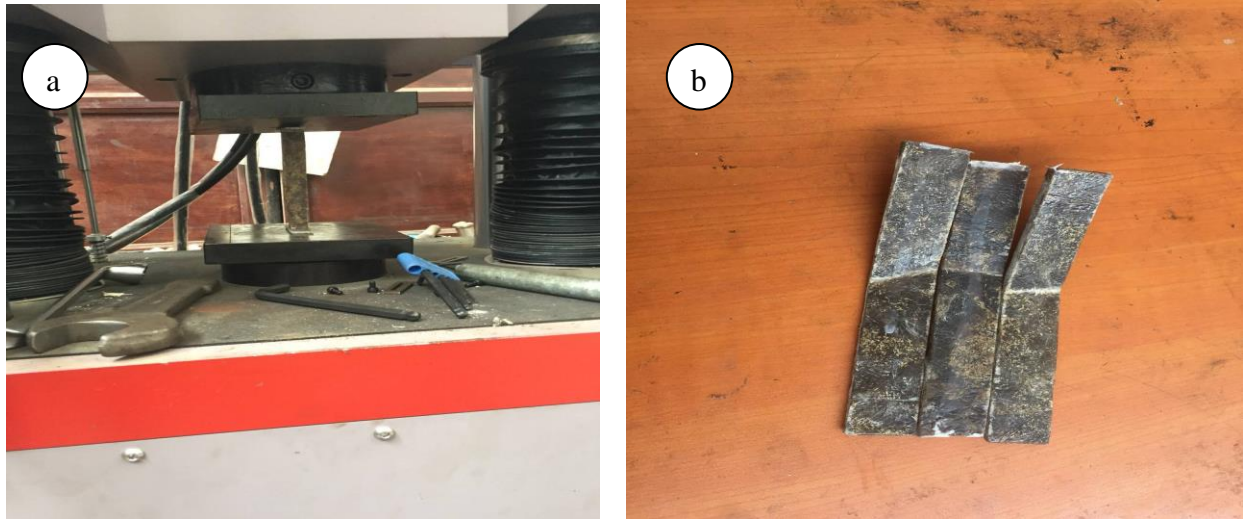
performing compression strength test: a) sample in compression testing b) after testing and brakes
